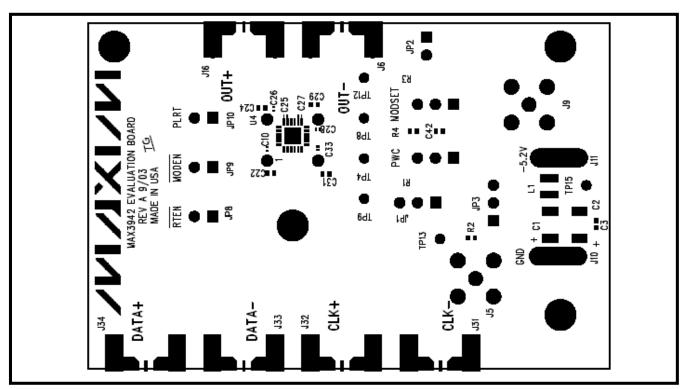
MAX3942 EV Kit Component Placement Guide—Component Side
